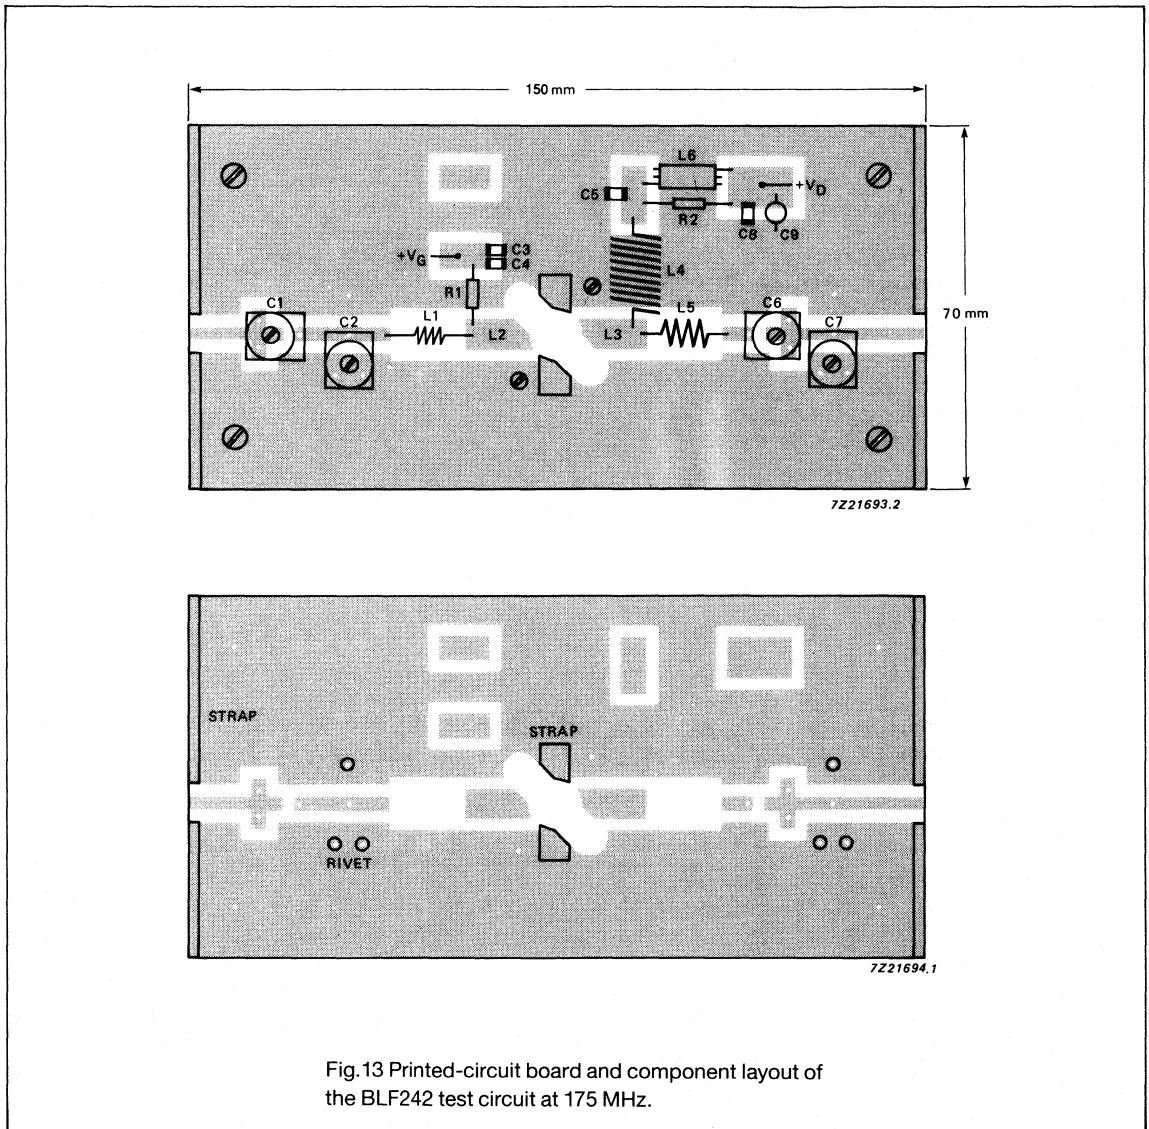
Printed-circuit board and component layout of the BLF242 test circuit at 175 MHz.
